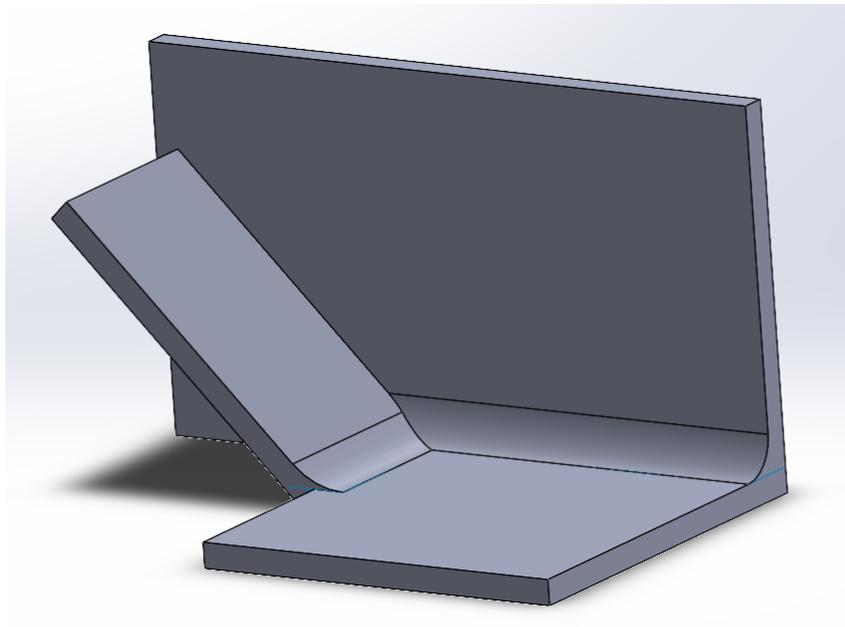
An example of a 90-degree wall interfacing with a 45-degree wall, modelled in Solidworks.
